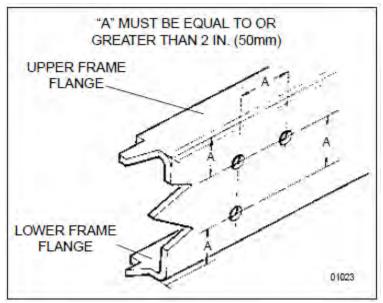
Hole Location Guidelines for Frame Rail and Bracket
